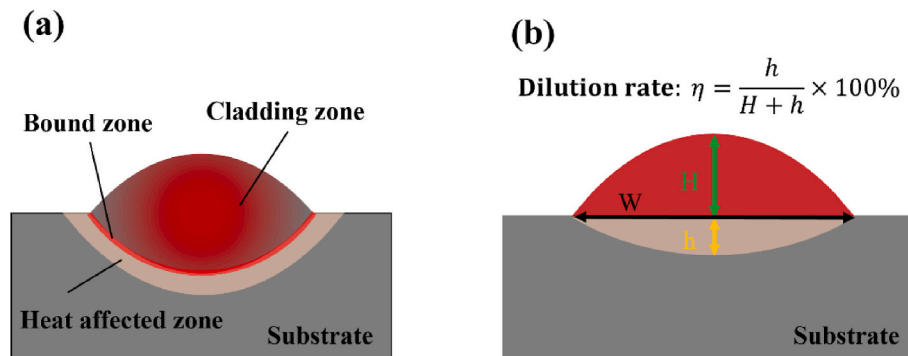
Cross-sectional view of the specimen after cladding, (a): cross-sectional morphology; (b): dilution rate.
